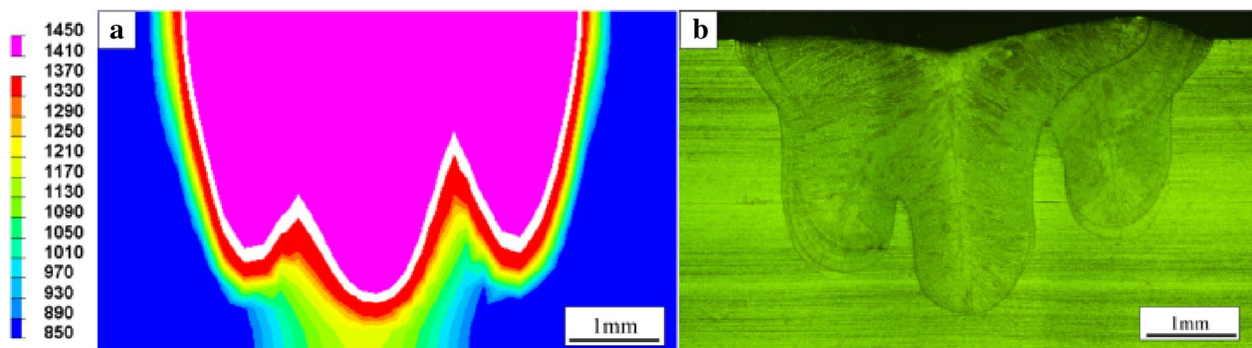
Shape of the welded joint of single-pass weld
